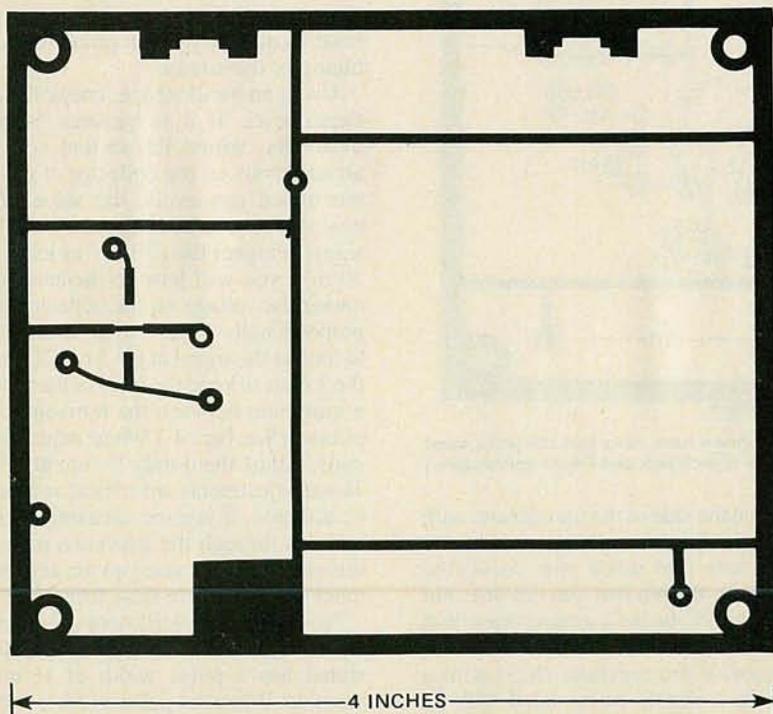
THE COMPONENT SIDE of the decoder board. Note that there are only 7 connections to be made on this side of the double-sided board, so plated-through holes are not necessary.
